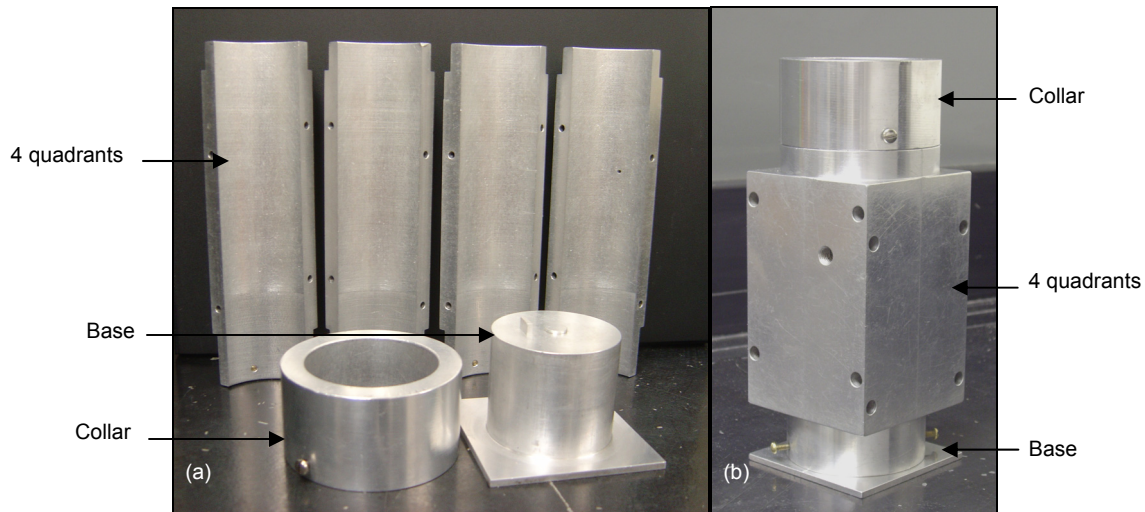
Compaction split mold: (a) disassembled and (b) assembled.
